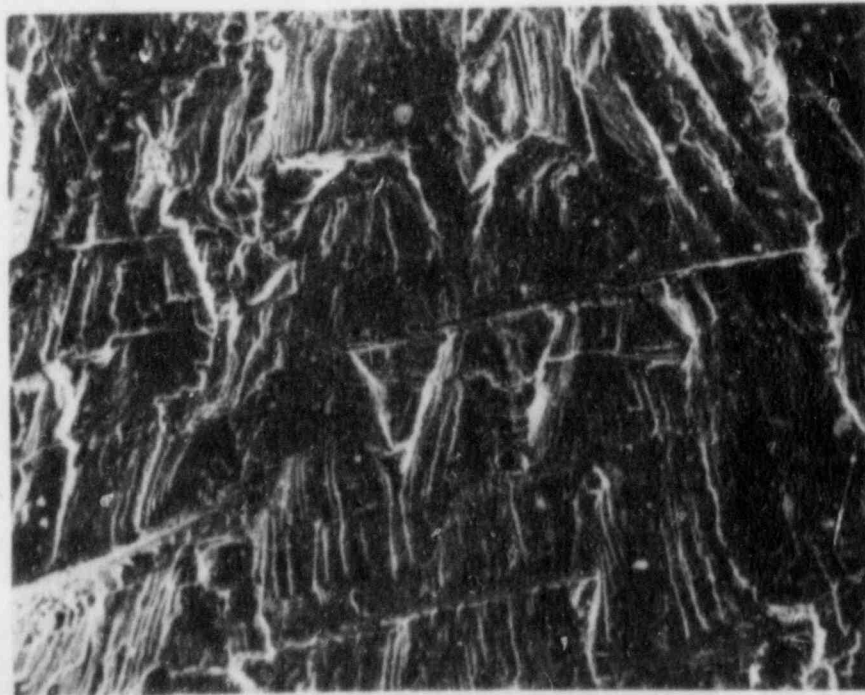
Fatigue fracture surface of specimen A9-108C, tested at 232°C (450°F). Applied  $\Delta K = 25 \text{ MPa}\sqrt{\text{m}}$ . In this view, the brittle-like appearance is very clear.
